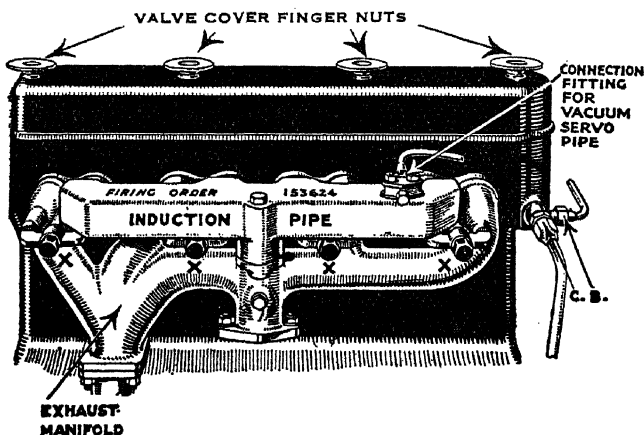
Typical Six-Cylinder Engine Induction and Exhaust Arrangement.
